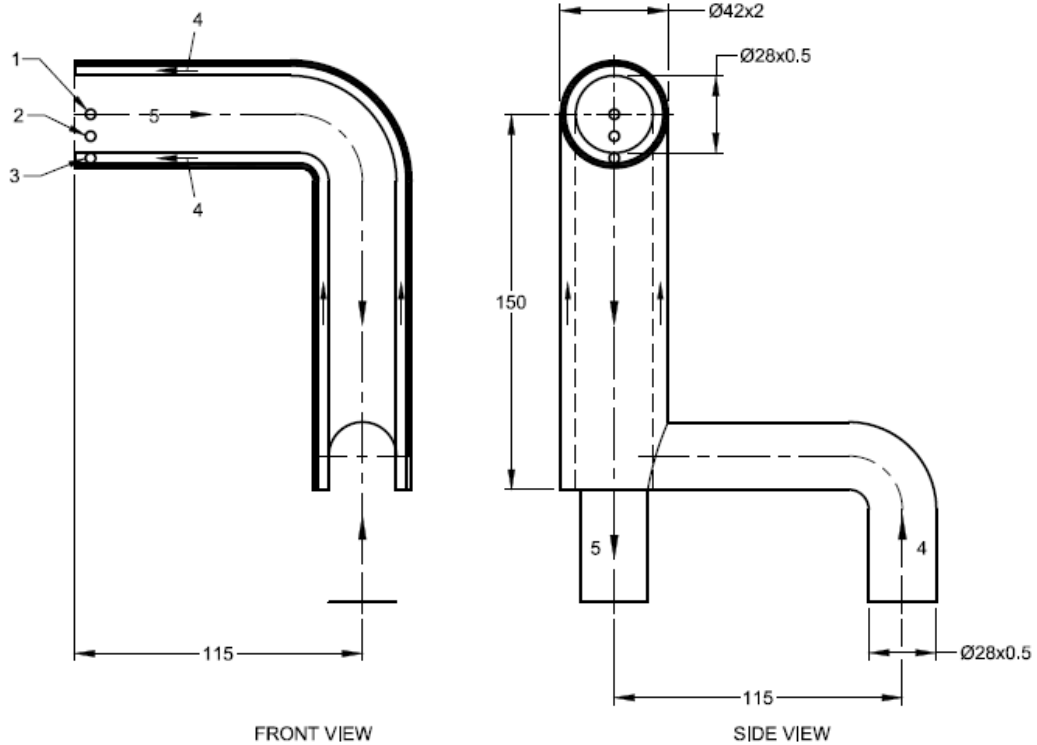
SCHEME OF TEST EQUIPMENT FOR TESTING CARBON MONOXIDE PERFORMANCE USING DUMMY HEAD
